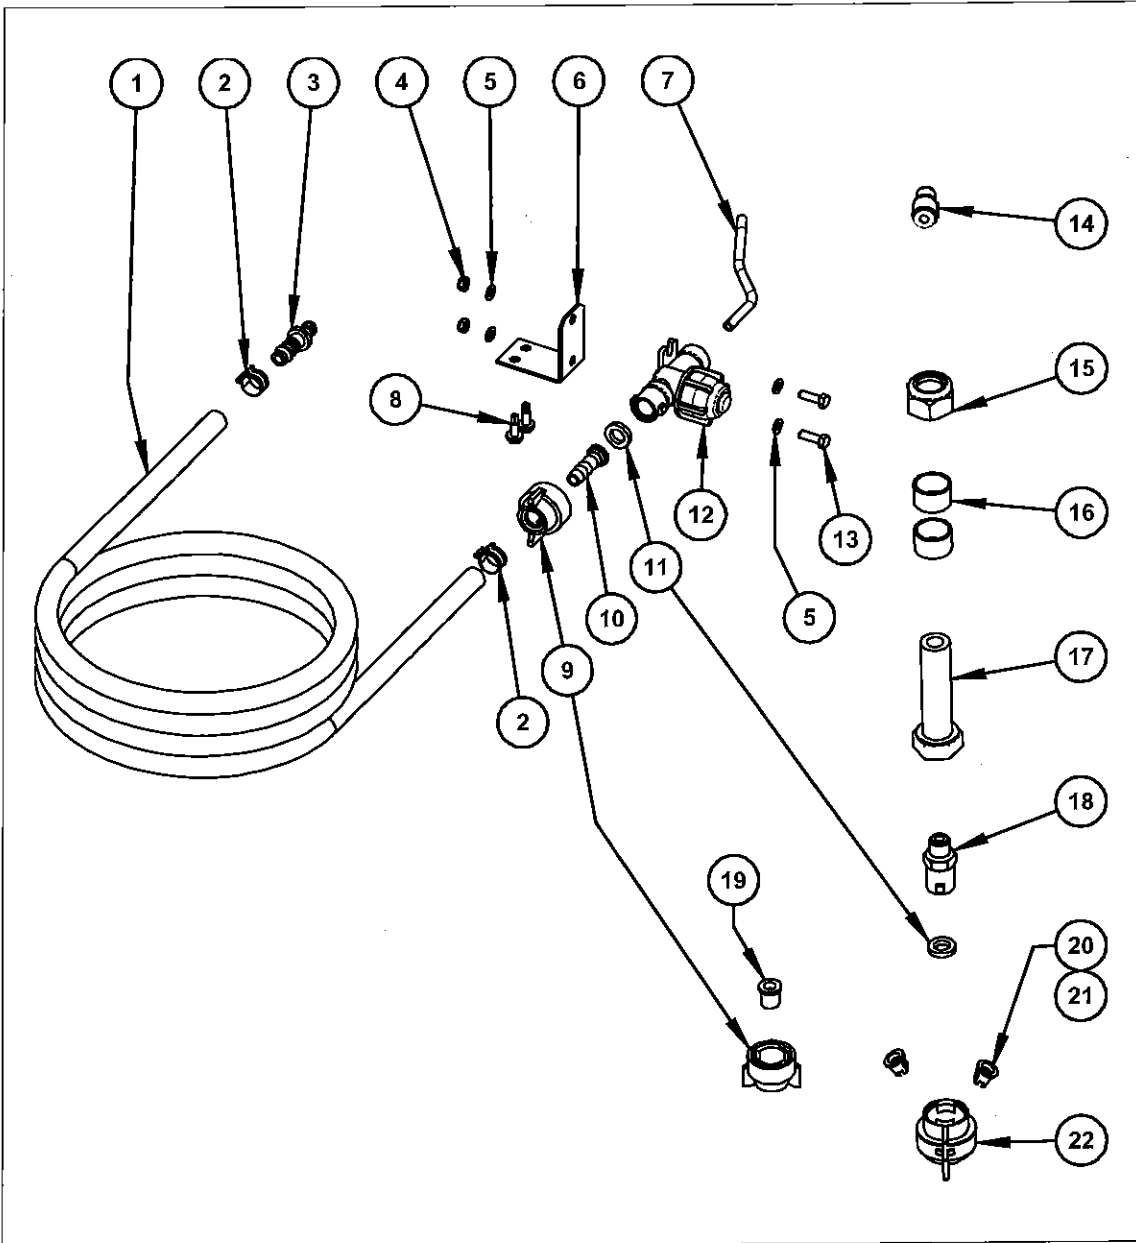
Hi-Flo Nozzle Assembly, Single (UK Models)
